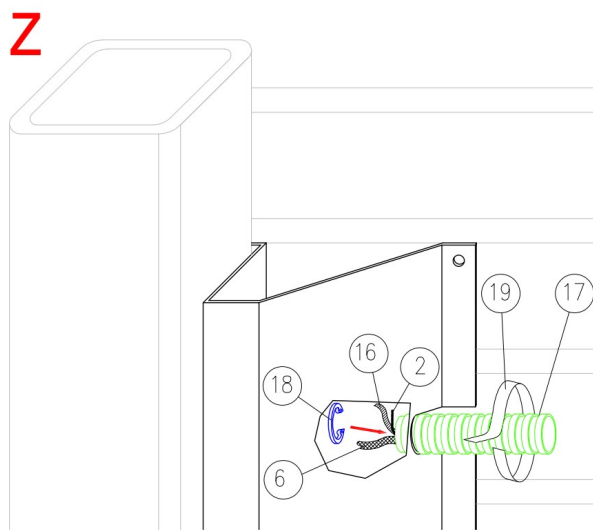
Detail Z: from Fig. 5: Fastening the protective sleeve to the cable duct
